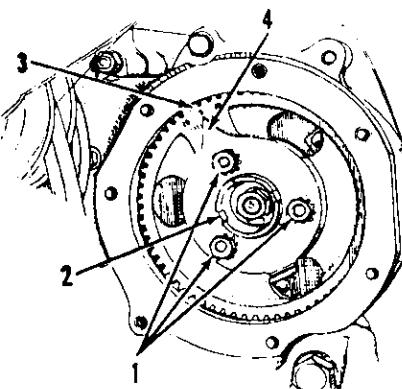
Injection pump drive gear used on early B-275 tractors equipped with injection pump having pneumatic governor.
